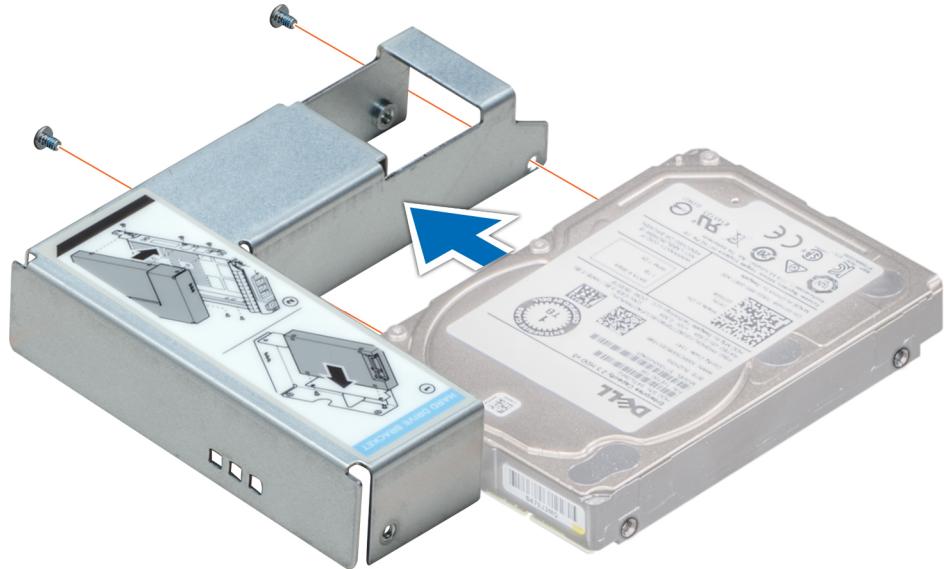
Installing a 2.5-inch drive into the 3.5-inch drive adapter
